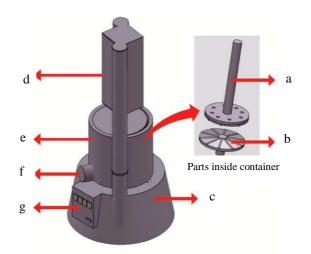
3D Model of Green Grass Jelly Squeezer. (a) Upper squeezer (b) Bottom squeezer (c) AC motor (d) Servomotor (e) Container (f) Sensor module (g) Power button and speed controller
